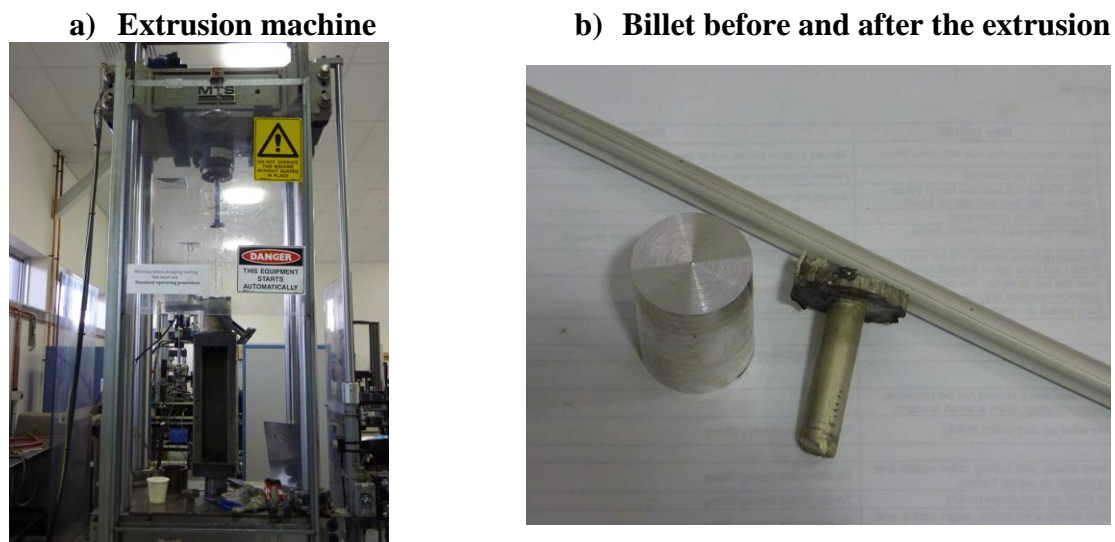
a) Extrusion machine and b) the billet before and after the extrusion.
